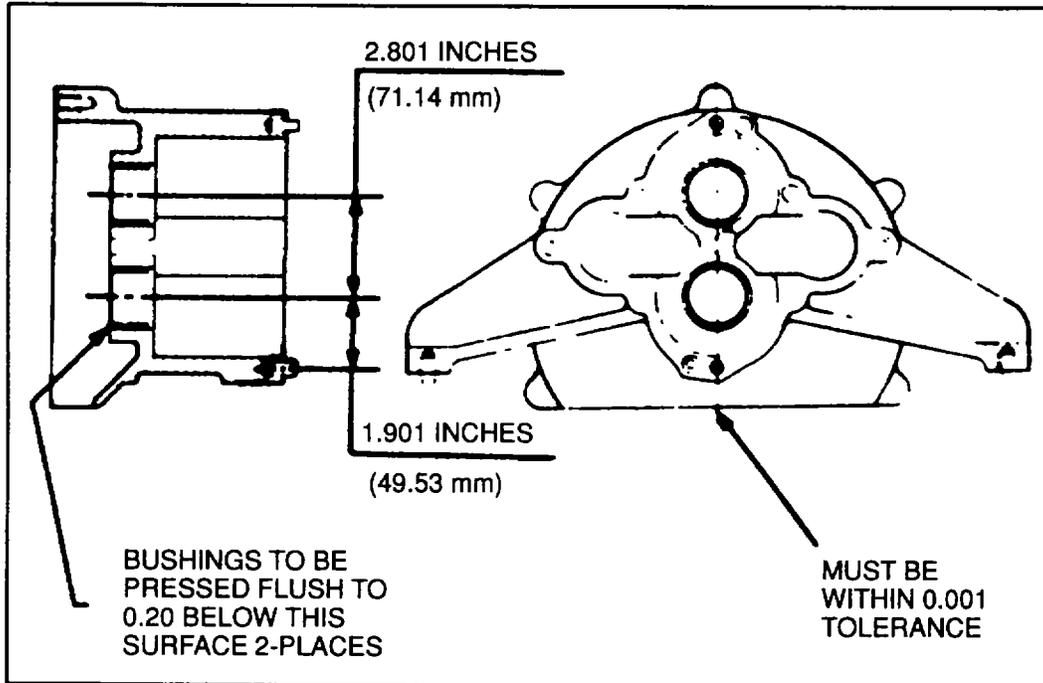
Dimensions of the Bushings In the Lubricating Oil Pump Body
